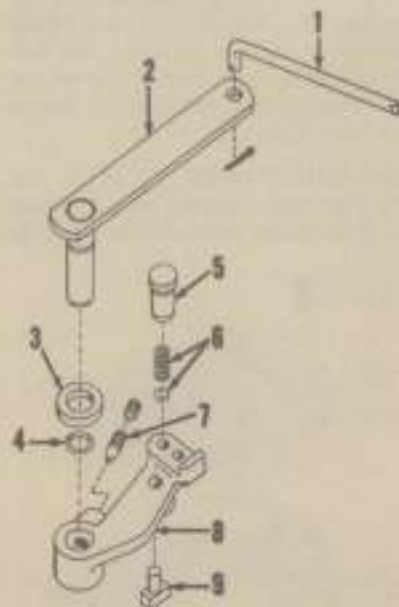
Exploded view of the belt pulley shifter (8) and the associated parts.
